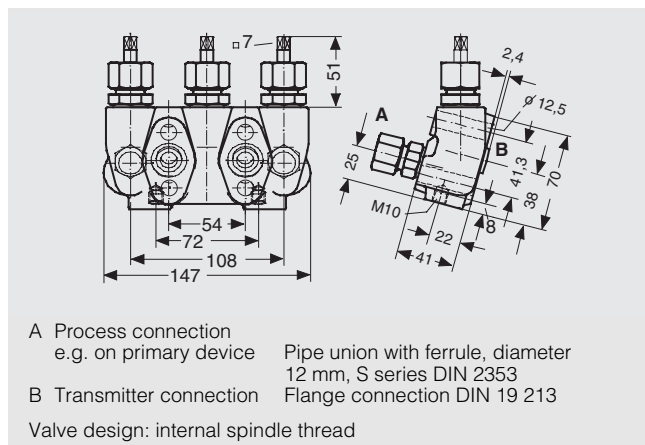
/66 Three-way valve manifold DN 5, dimensions
